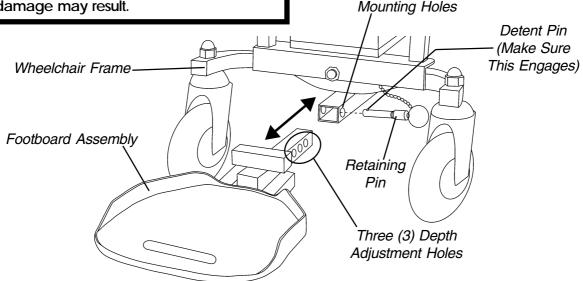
REMOVING/INSTALLING/ADJUSTING THE FOOTBOARD ASSEMBLY
